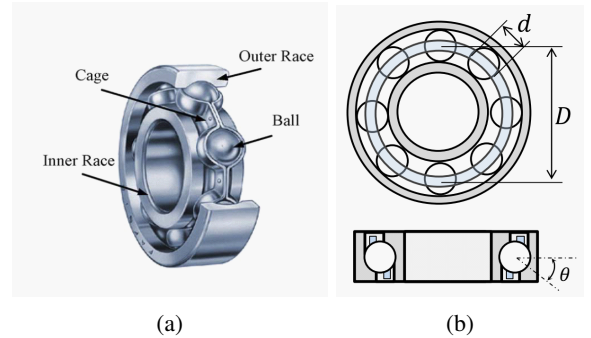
(a) Structure of a ball bearing and (b) the cross sectional view with geometric parameters.
